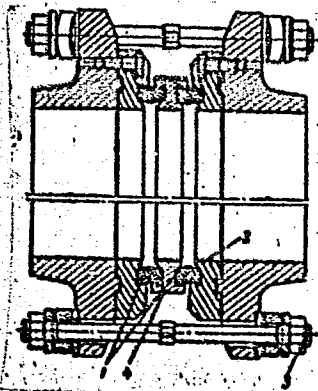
1 - elastic rubber elements; 2 - flange; 3 - coupling; 4 - floating ring.
